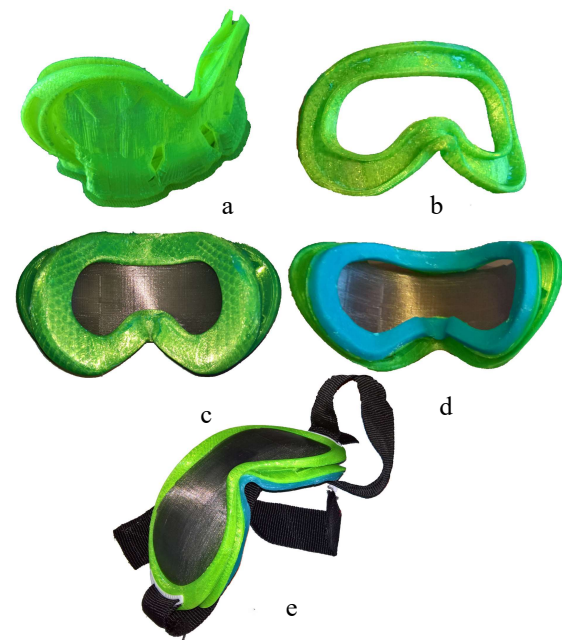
Ski goggles prototype: a – 3D printed goggles frame; b – 3D printed half mold; c – half mold mounted on the frame; d – silicone band after demolding; e – ski goggles prototype.
